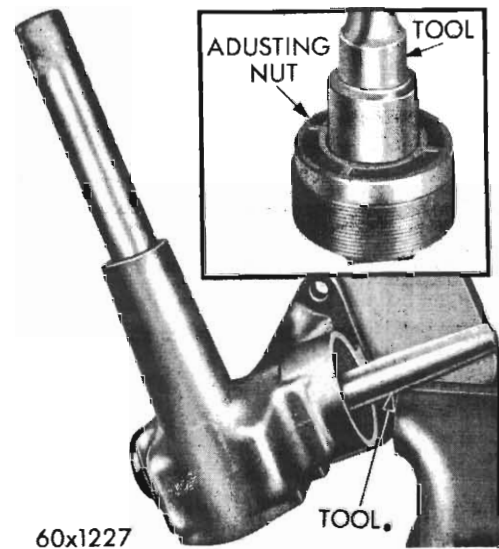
Installing wormshaft bearing cups (typical) (Tool E19C15A)
